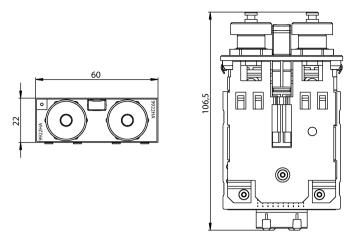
MM900 dimension drawing 6: M12 ports electrical
